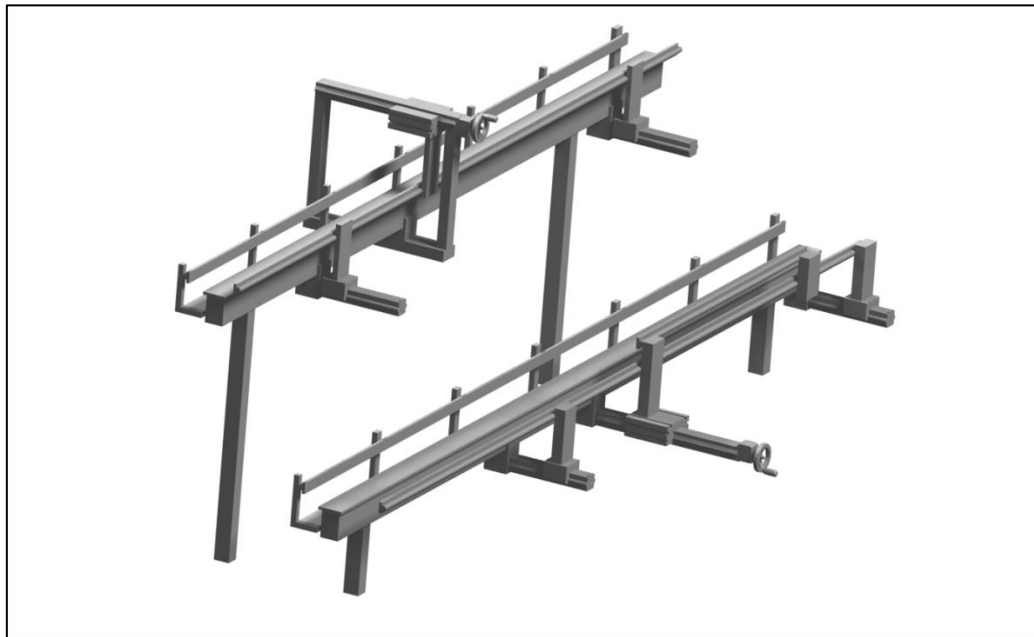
A picture of guide rails in the robot cell with hand wheels.
